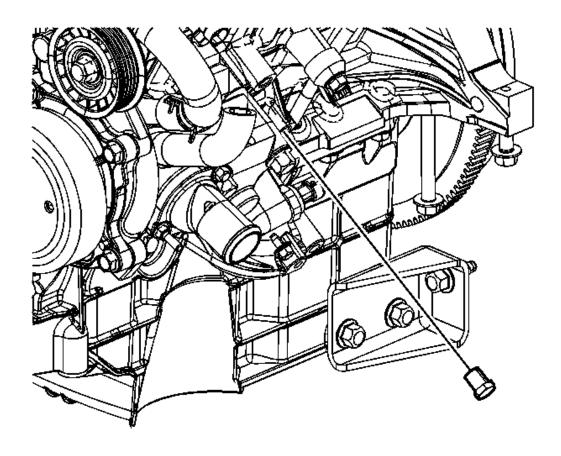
Identifying Left Side Coolant Drain Plug Courtesy of GENERAL MOTORS CORP.
